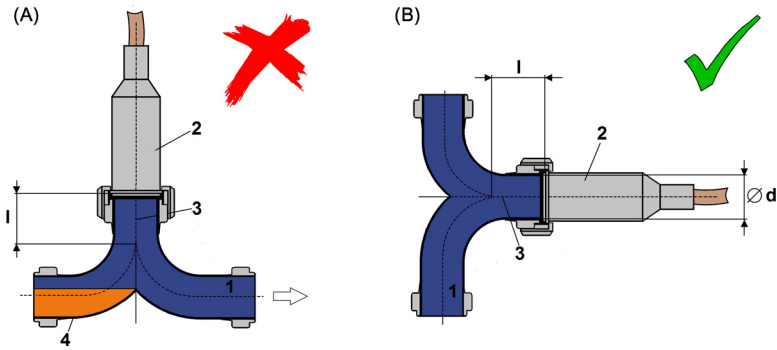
Incorrect mounting of sensors (2) in process lines (1) may give rise to tees with closed ends (3), which may create large dead areas if too long. (A) But a swept tee if mounted in a horizontal pipeline may impede adequate drainage (4). (B) Swept tees should be mounted in a vertical pipeline. Dimension “l” must be as short as possible relative to dimension “d,” maximum $l = d$ (Lelieveld et al., 2003; Hauser et al., 2007).
